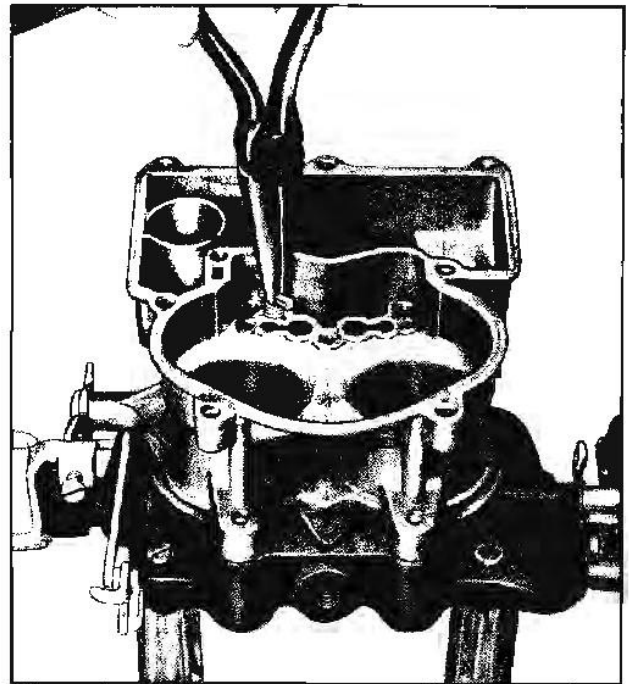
B-49 Removing Pump Discharge Spring Retainer
